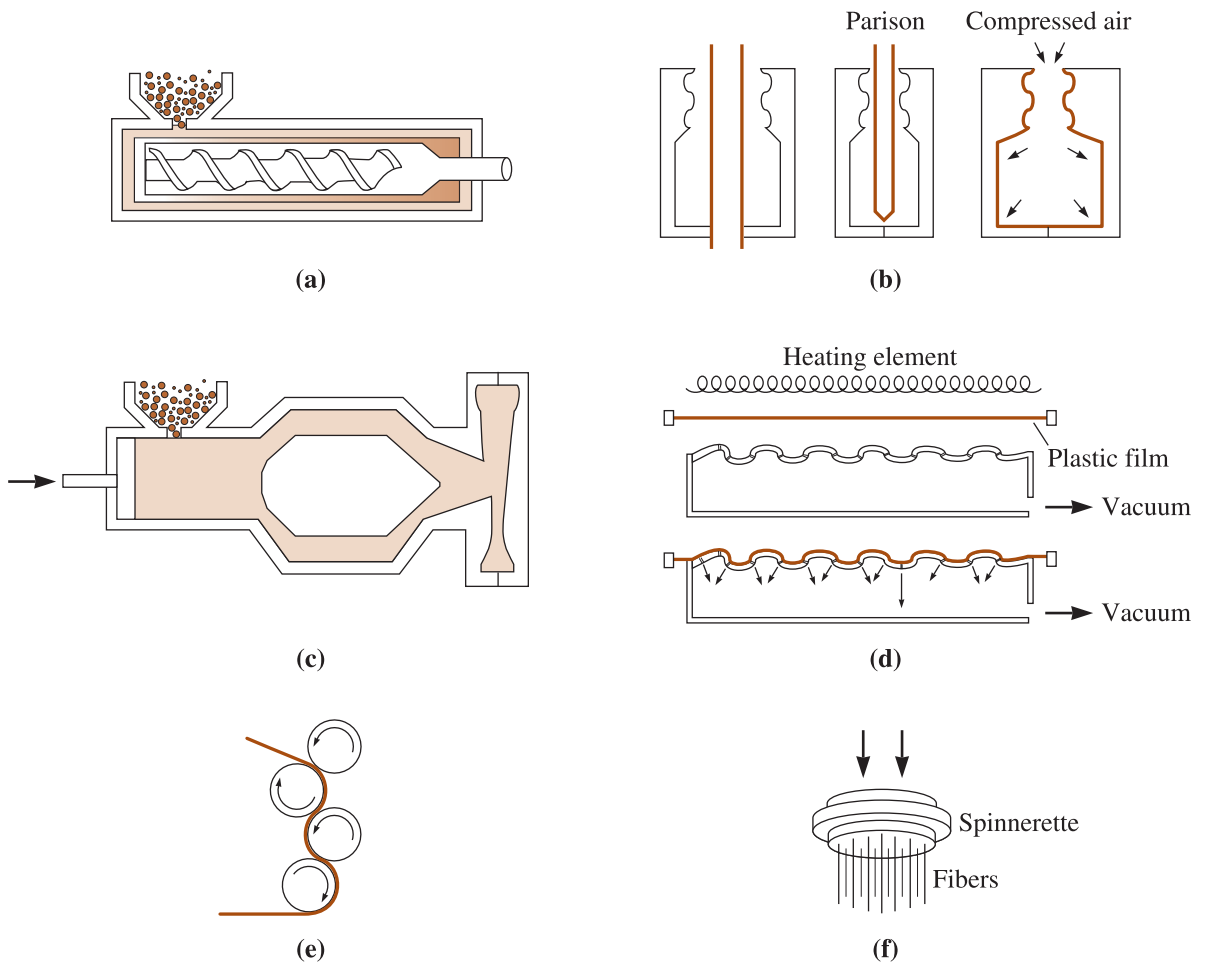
Typical forming processes for thermoplastic: (a) extrusion, (b) blow molding, (c) injection molding, (d) thermoforming, (e) calendaring, and (f) spinning.
